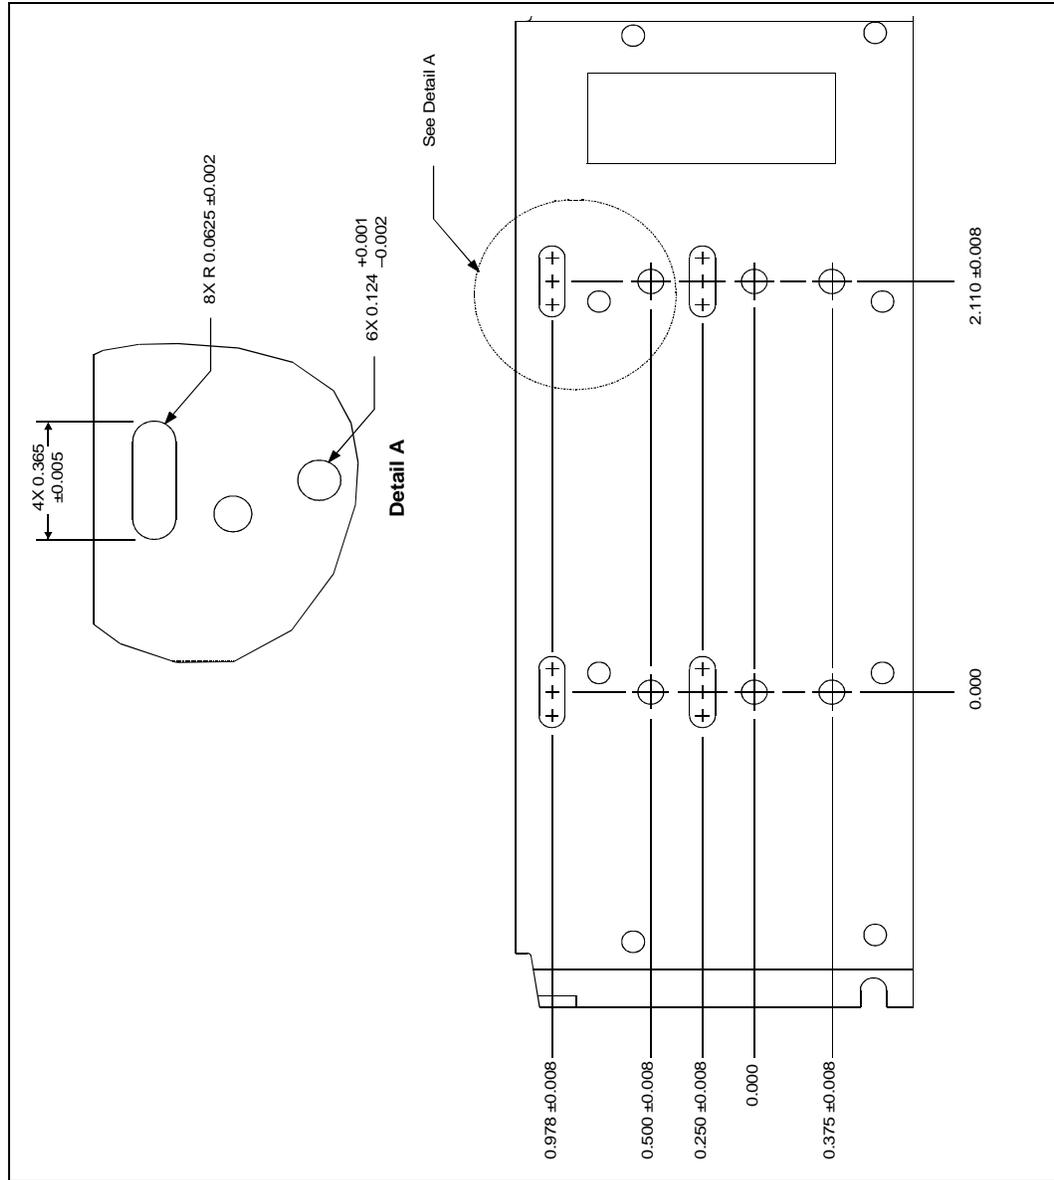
S.E.C.C. Packaged Processor — Extended Thermal Plate Attachment Detail Dimensions, Continued
